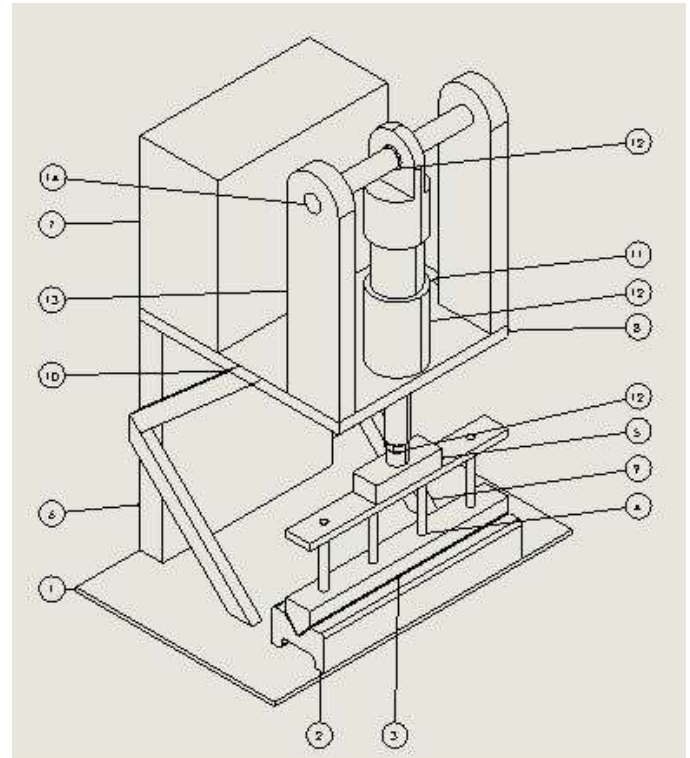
Drafting Assembly View With Balloning of Mini Hydraulic press Machine
